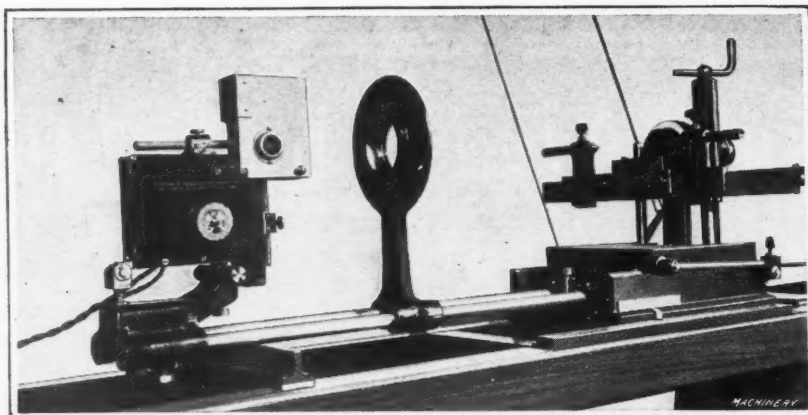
Horizontal Projector for examining the Form of Screw Threads
